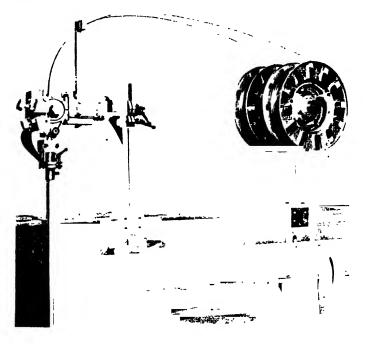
(c) The consumable guide welding process using, in this case, twin wire/tube system. The dams have been removed to show the position of the guide tubes.
